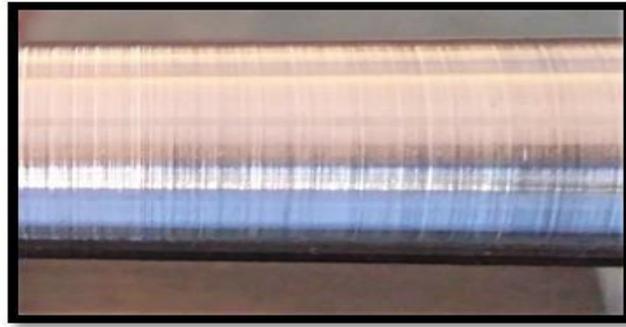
(B): Variation in surface finishing of workpiece when it is machined without worn out tool
